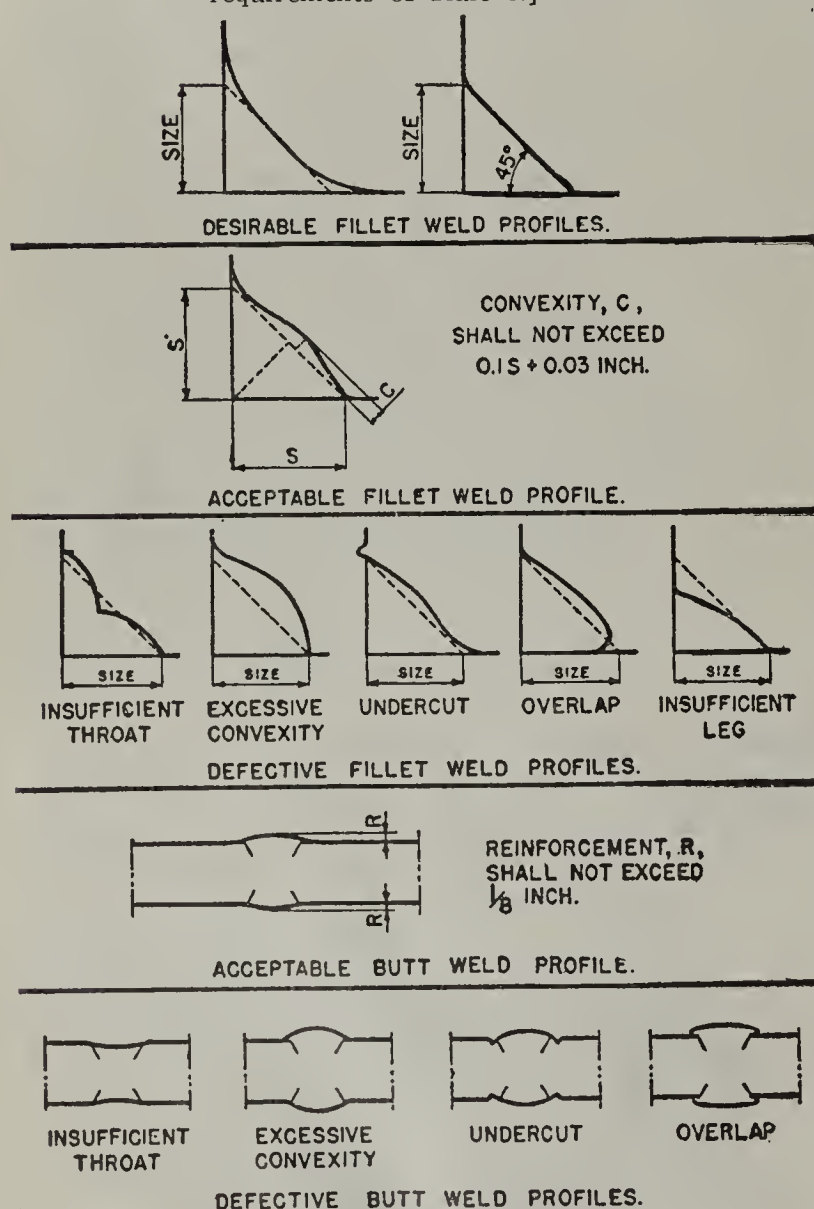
Acceptable and Defective Weld Profiles
